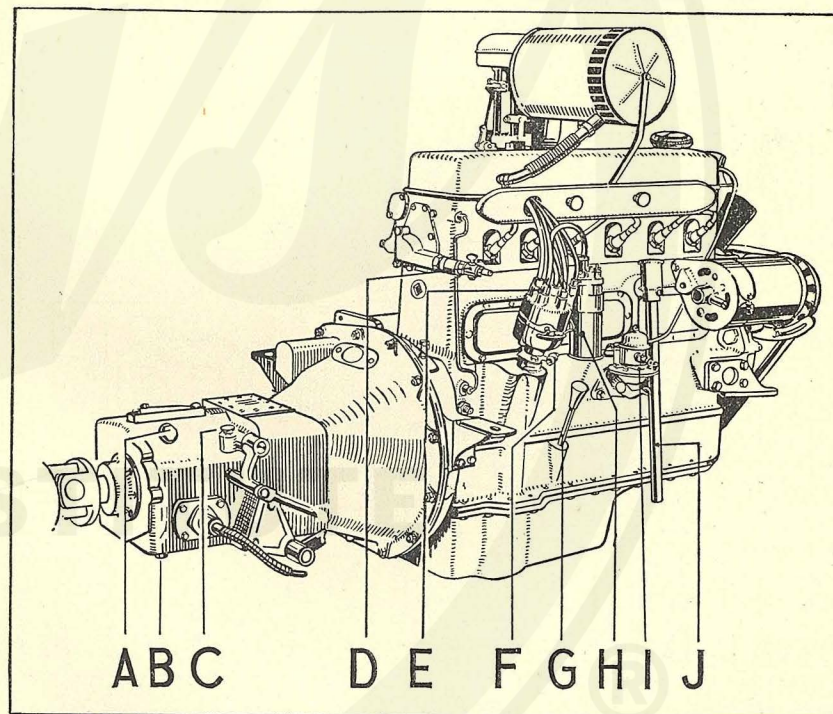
A, gear box oil filler plug; B, gear box drain plug; C, gear box oil level dipstick; D, interior heater control tap; E, distributor; F, bolt for adjusting ignition timing; G, engine oil level dipstick; H, ignition coil; I, petrol pump; J, crankcase breather.
